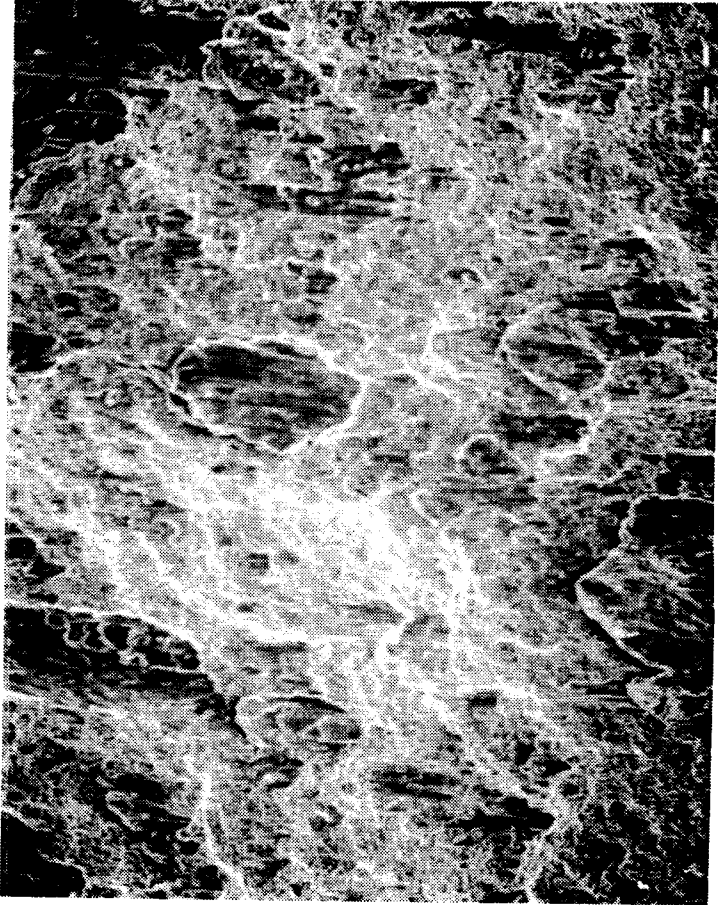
Fracture Surface Of Longitudinal Fillet
